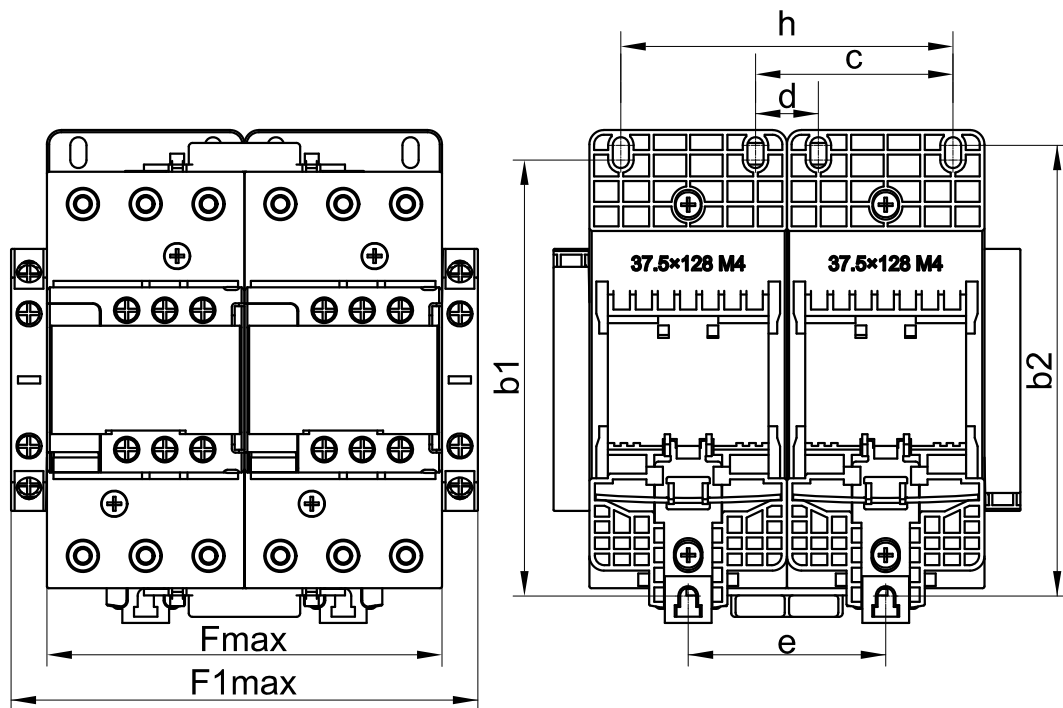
HDCX-40~65 reversible contactor overall installation dimension
